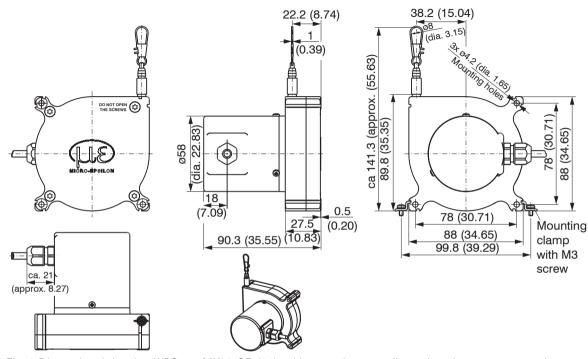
Dimensional drawing WPS- ... -MK88-CR (01), with potentiometer, dimensions in mm, not to scale
